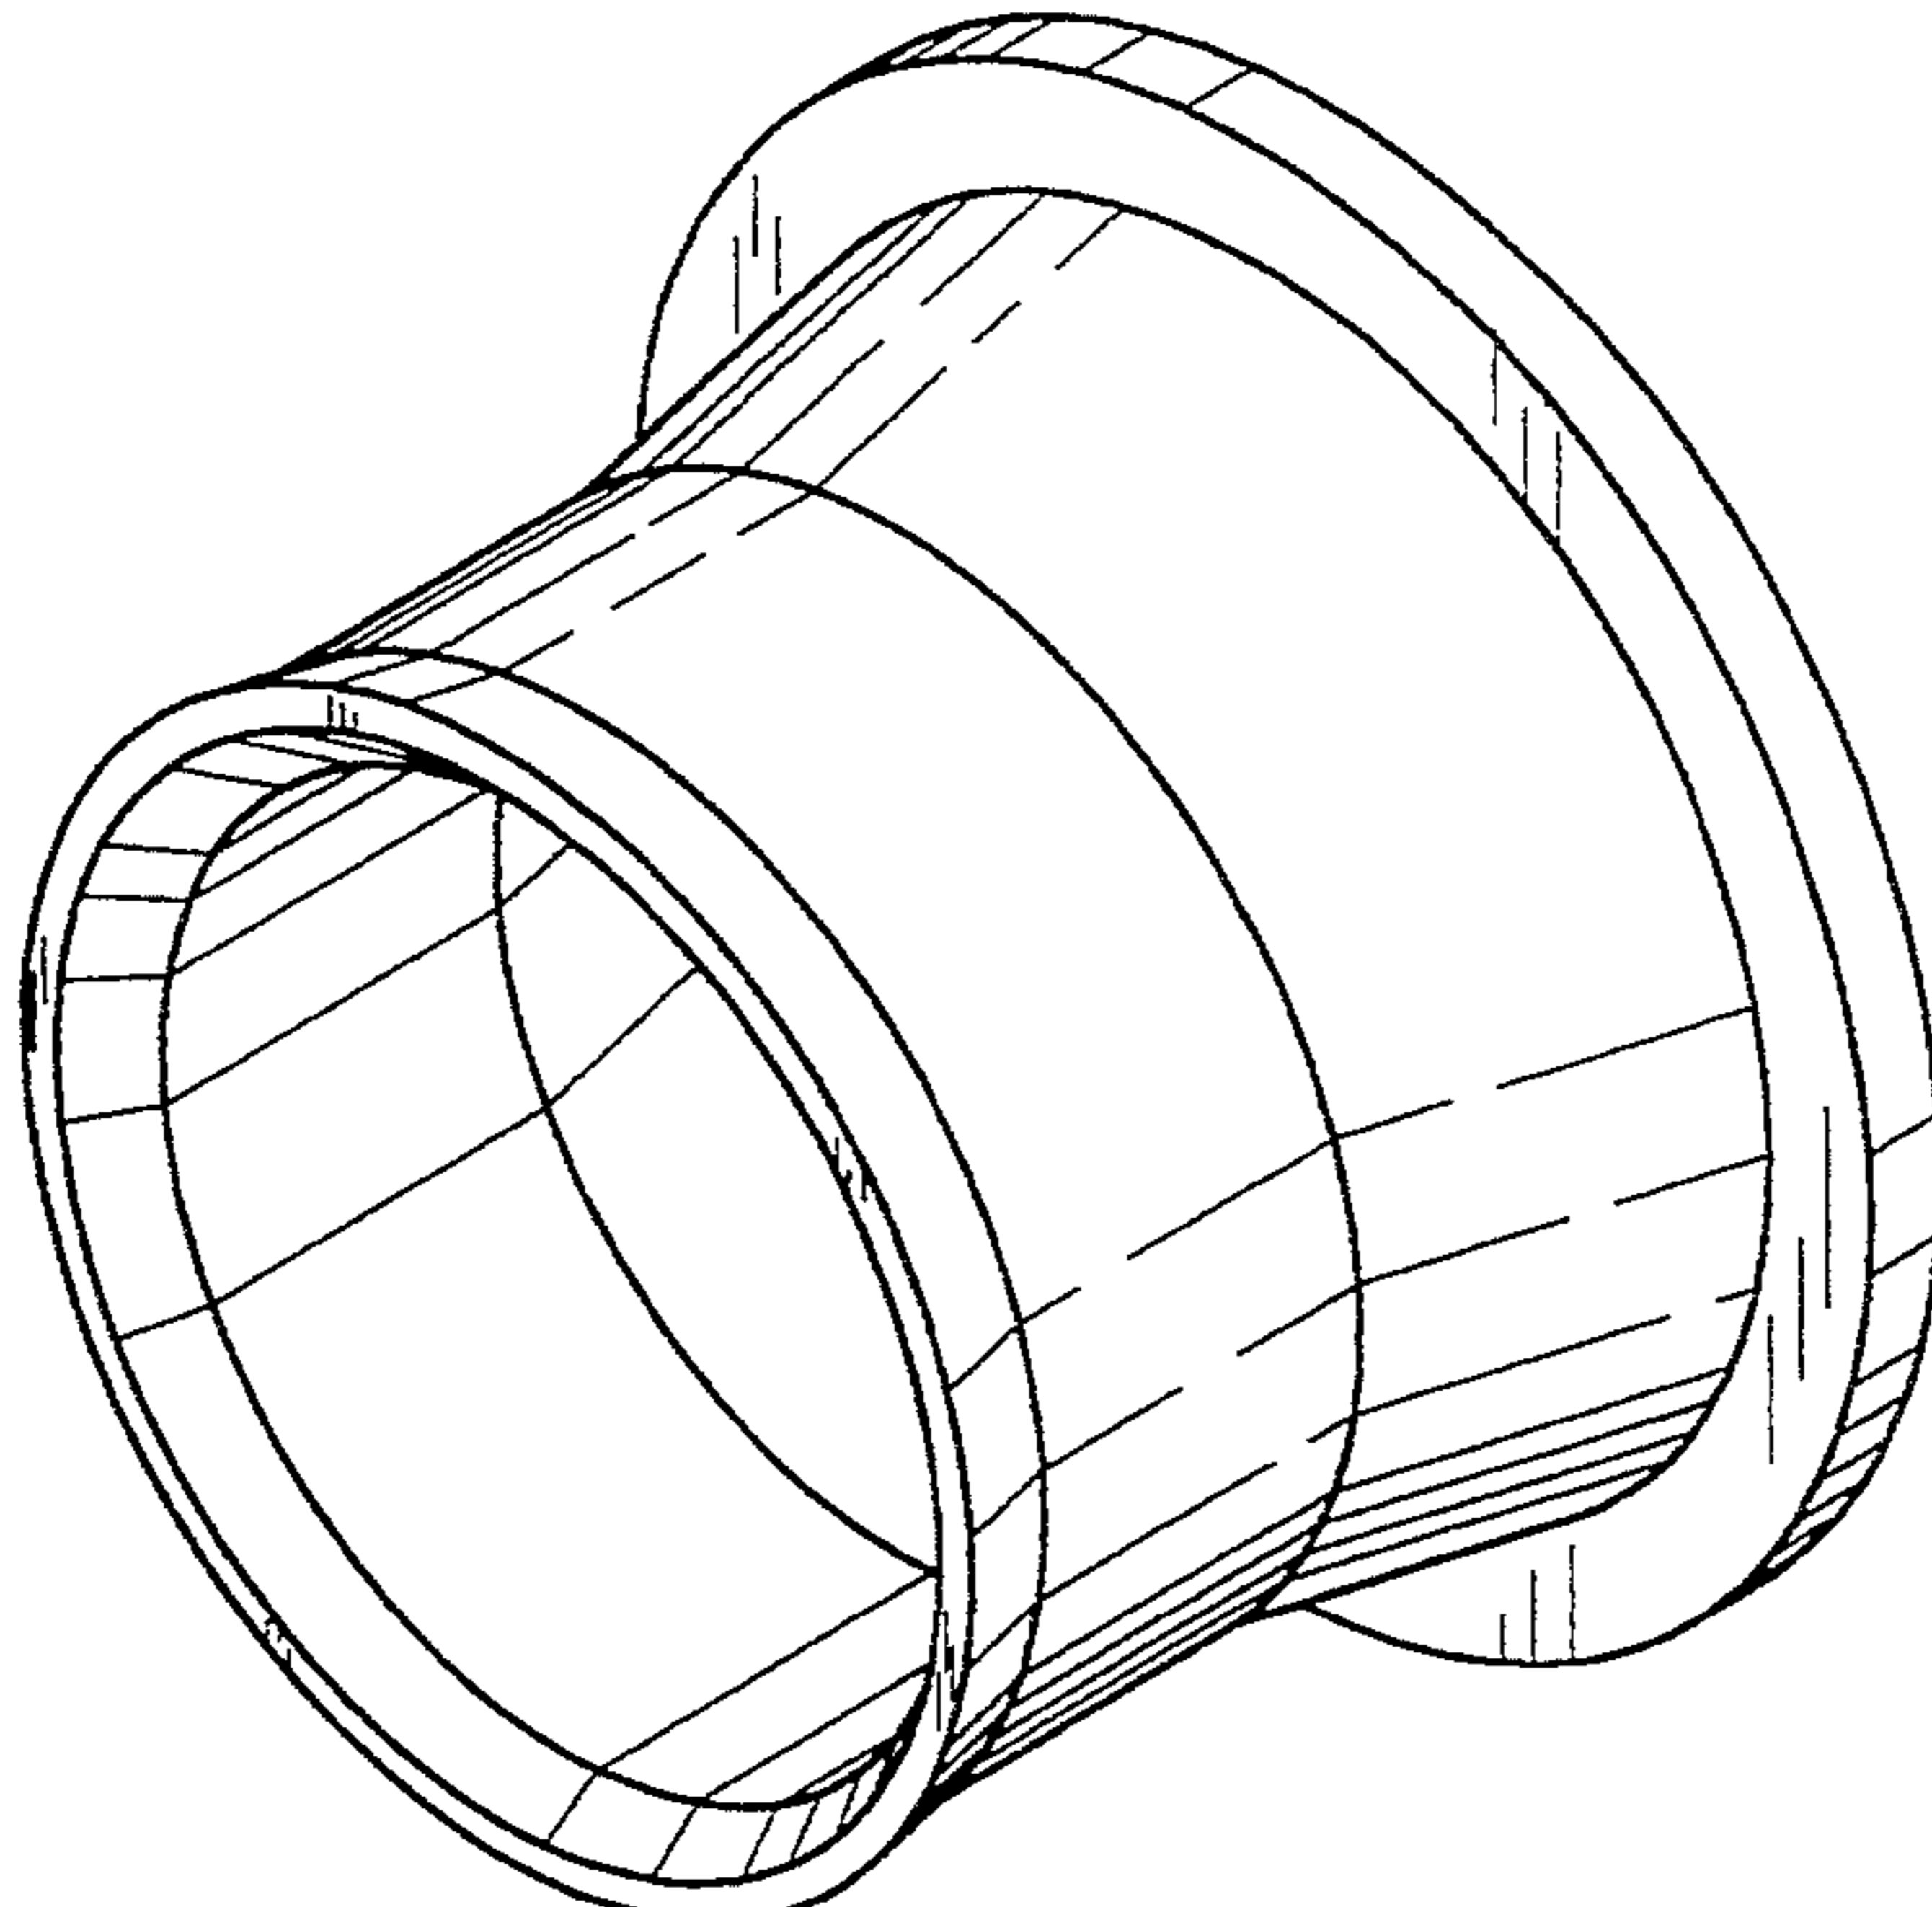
is a perspective view of an exhaust system pressure control showing my new design;
